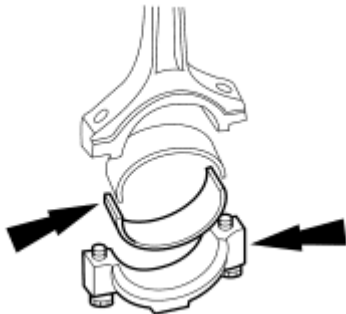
Positioning Lower Connecting Rod Bearing And Connecting Rod Cap
